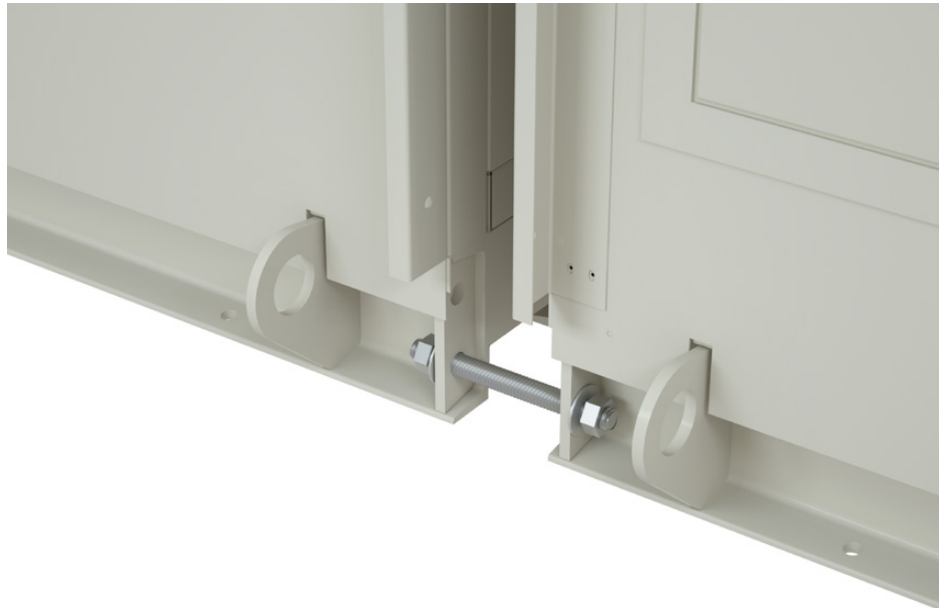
BOLTS, WASHERS AND NUTS USED TO FASTEN THE BASE TOGETHER ▼
